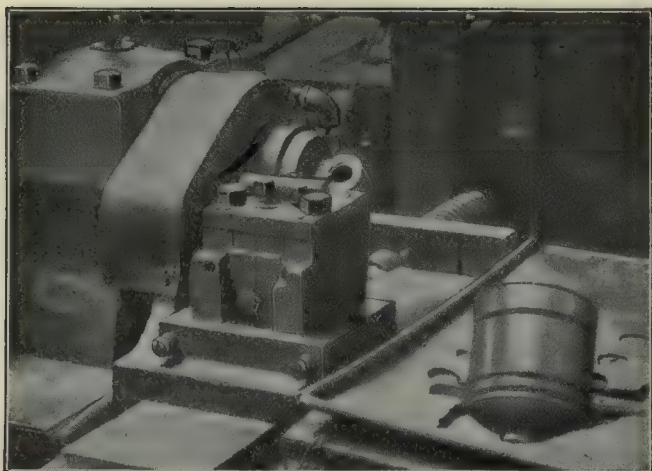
CUTTING SIDE RELIEF IN LATHE
